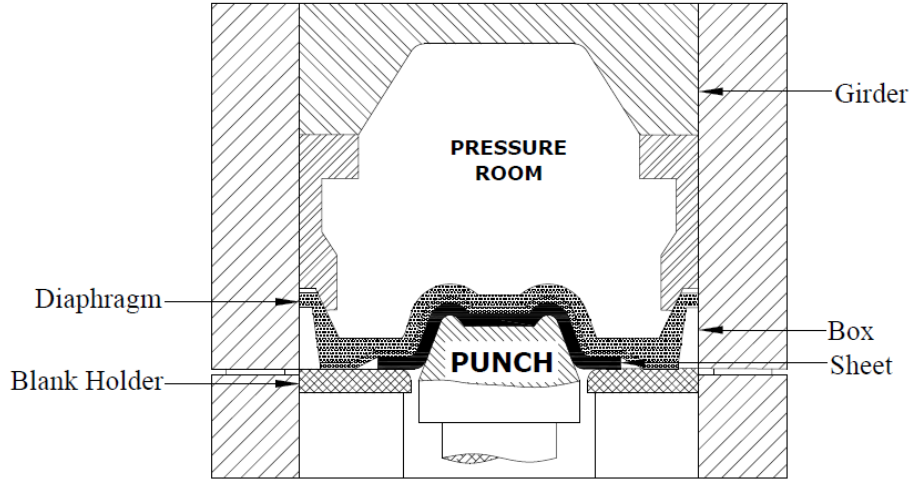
Rubber Based Sheet Hydroforming Set-up [6]
